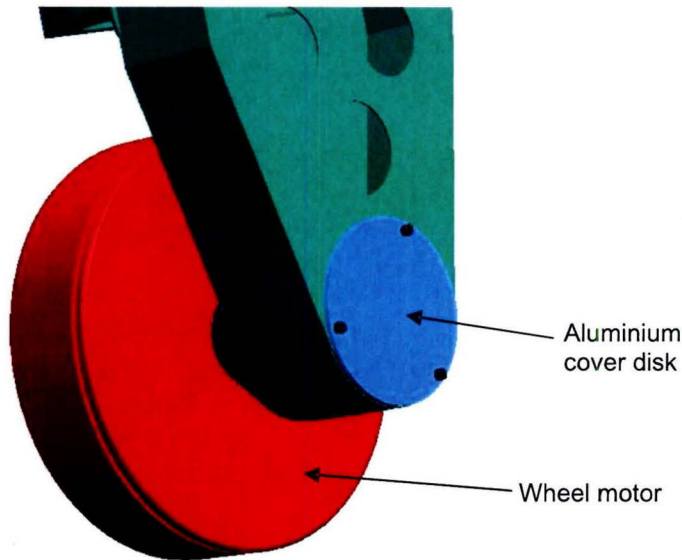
Wheel carrying arm with adapter, clamping ring, wheel motor and cover disc
